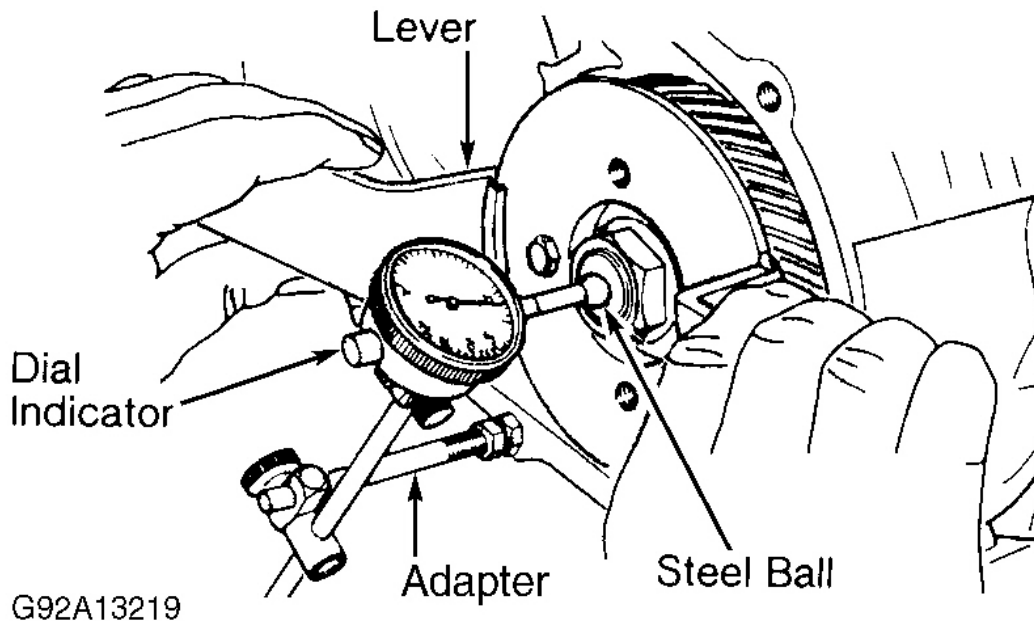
Checking Output Shaft or Transfer Shaft End Play
